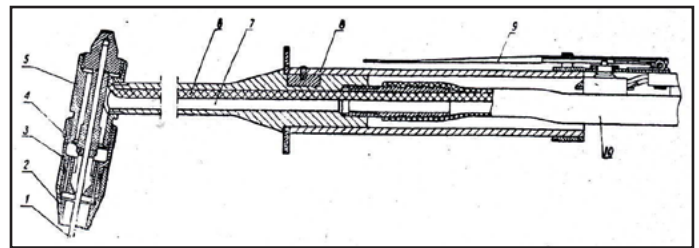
TIG welding torch designed at the Aviation Institute [35]
